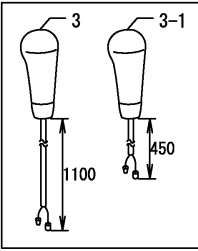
CONTROL EQUIPMENT(BOOM & BUCKET)
